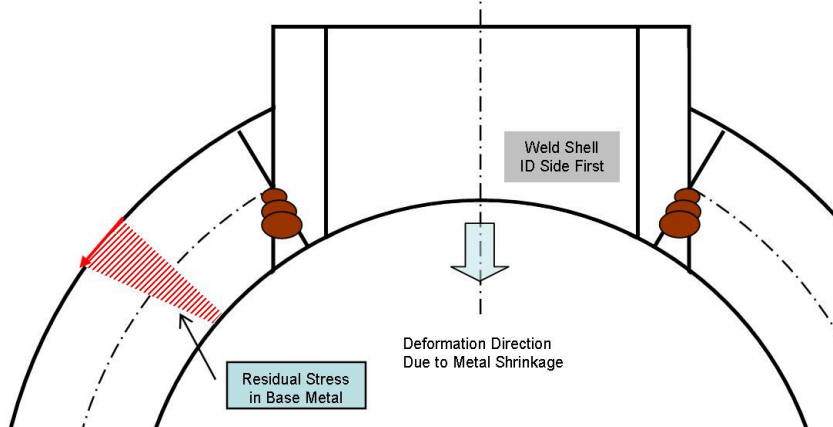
Single Nozzle Weld Distortion – Weld Pass Sequence – Contour Fixture
